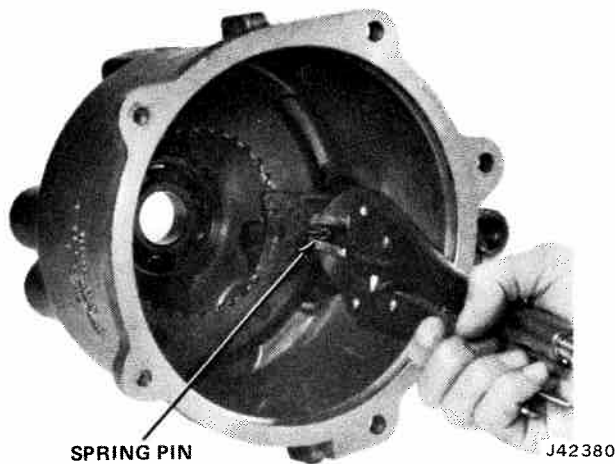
Removing Shift Fork Locating Spring Pin
